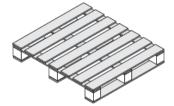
Four way entry pallet with bottom deck boards at the short sides of the pallet
